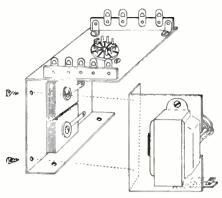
Layout for two chassis plates and main parts. Two selenium units may replace single silicon diode of Fig. 1.
